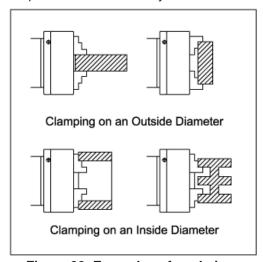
Examples of workpiece mounted in the 3-jaw chuck.
